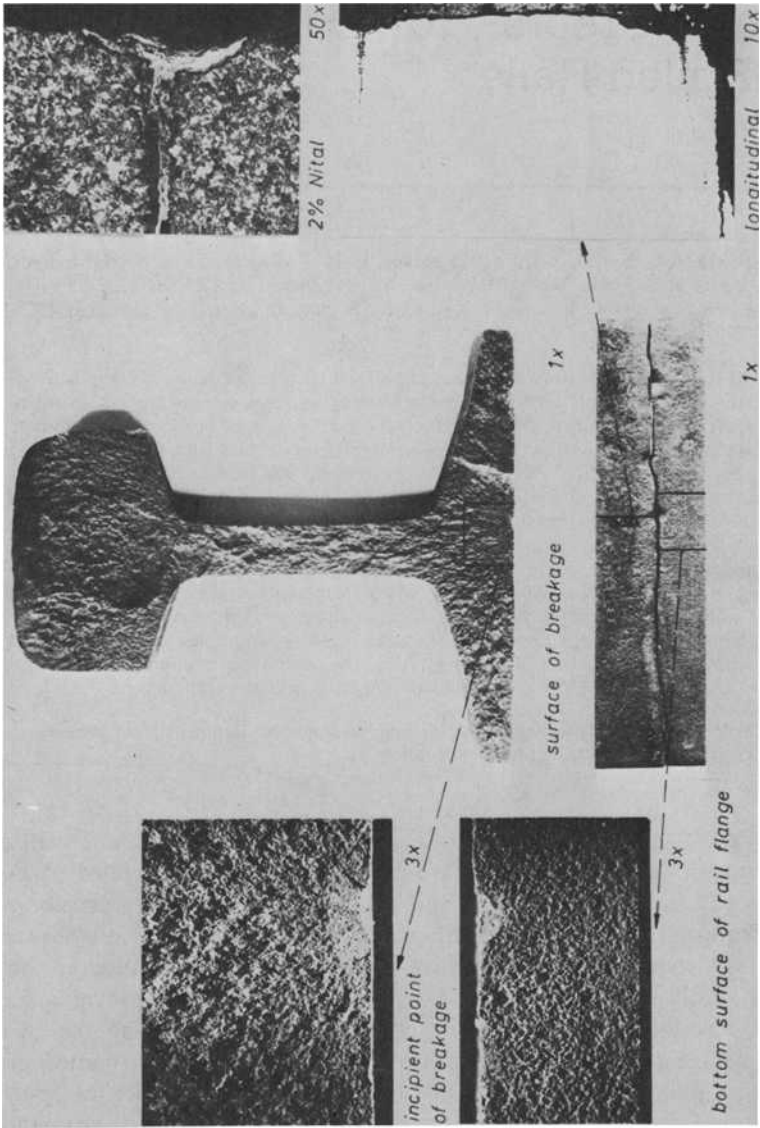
Brittle breakage on S49 fatigue fractures due to corrosion.
